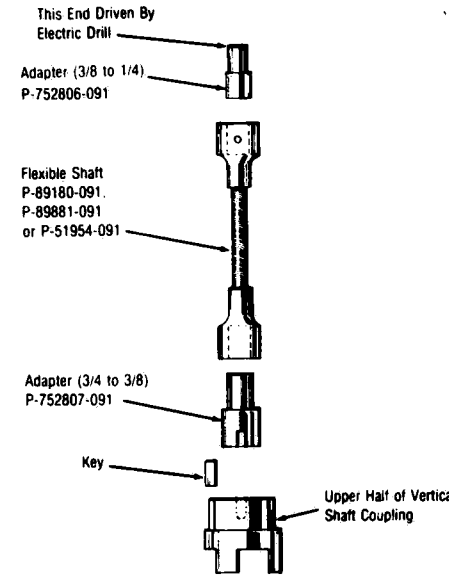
CLUTCH-DRIVE TOOL ASSEMBLY.
